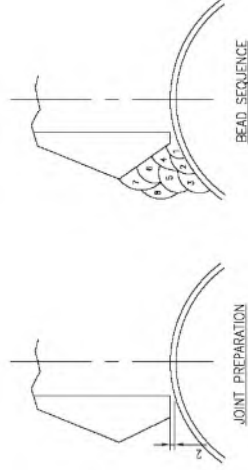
Alignment and welding practices for branch nozzle with O-let fitting
